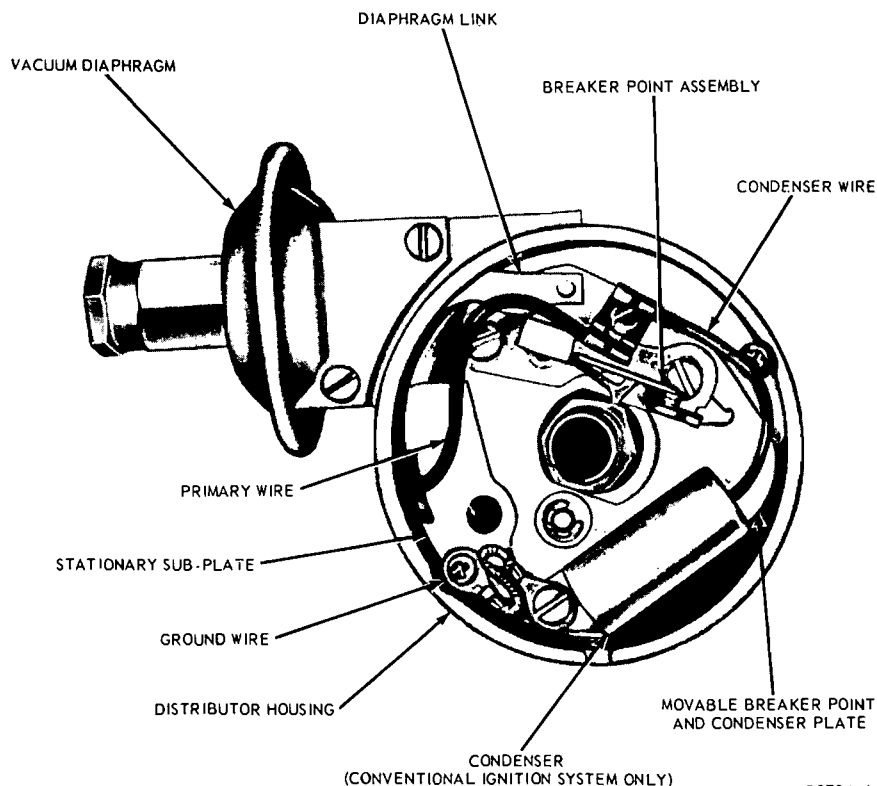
Breaker Plate Installed—Pivot-Type Points V-8 Engines
